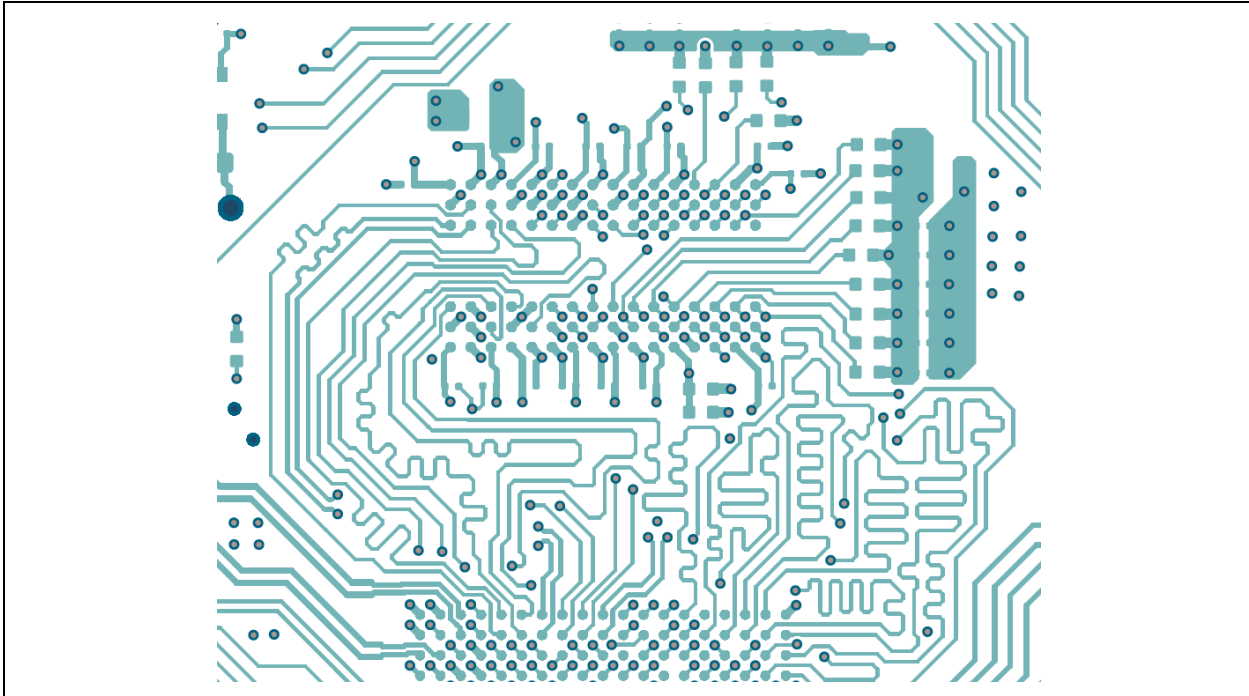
LAYER 6 – BOTTOM LAYER
